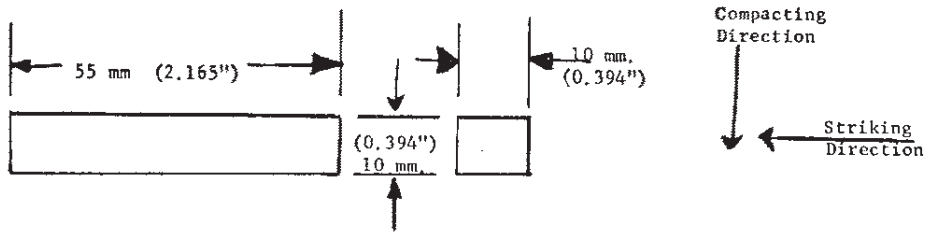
Izod (Cantilever-Beam) Impact Test Specimen, Type D
